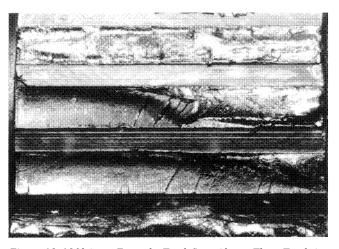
180° Away From the Teeth Seen Above, Three Teeth Are Seen to be Broken Off at the Root Diameter. The Fracture Surfaces of the Lower Two Exhibit Mutinucleated, High Cycle Fatigue, With Origins Along the Tooth Flank/Root Radii, on the Driver Seals.
